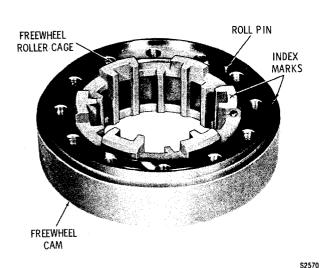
Freewheel roller cage installed in freewheel cam
